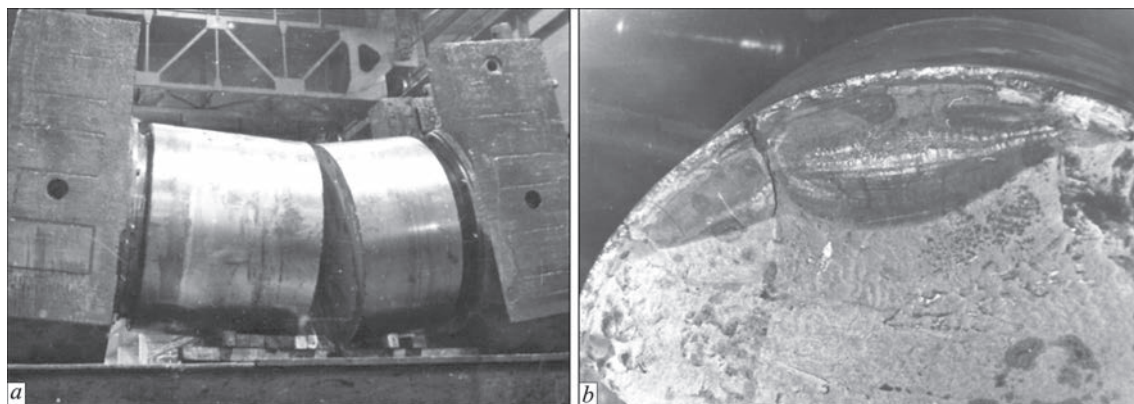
Fatigue fracture of a deposited roll: *a* — appearance of the roll with bearing assemblies after fracture; *b* — macrostructure of the crack initiation and propagation zone [5]
